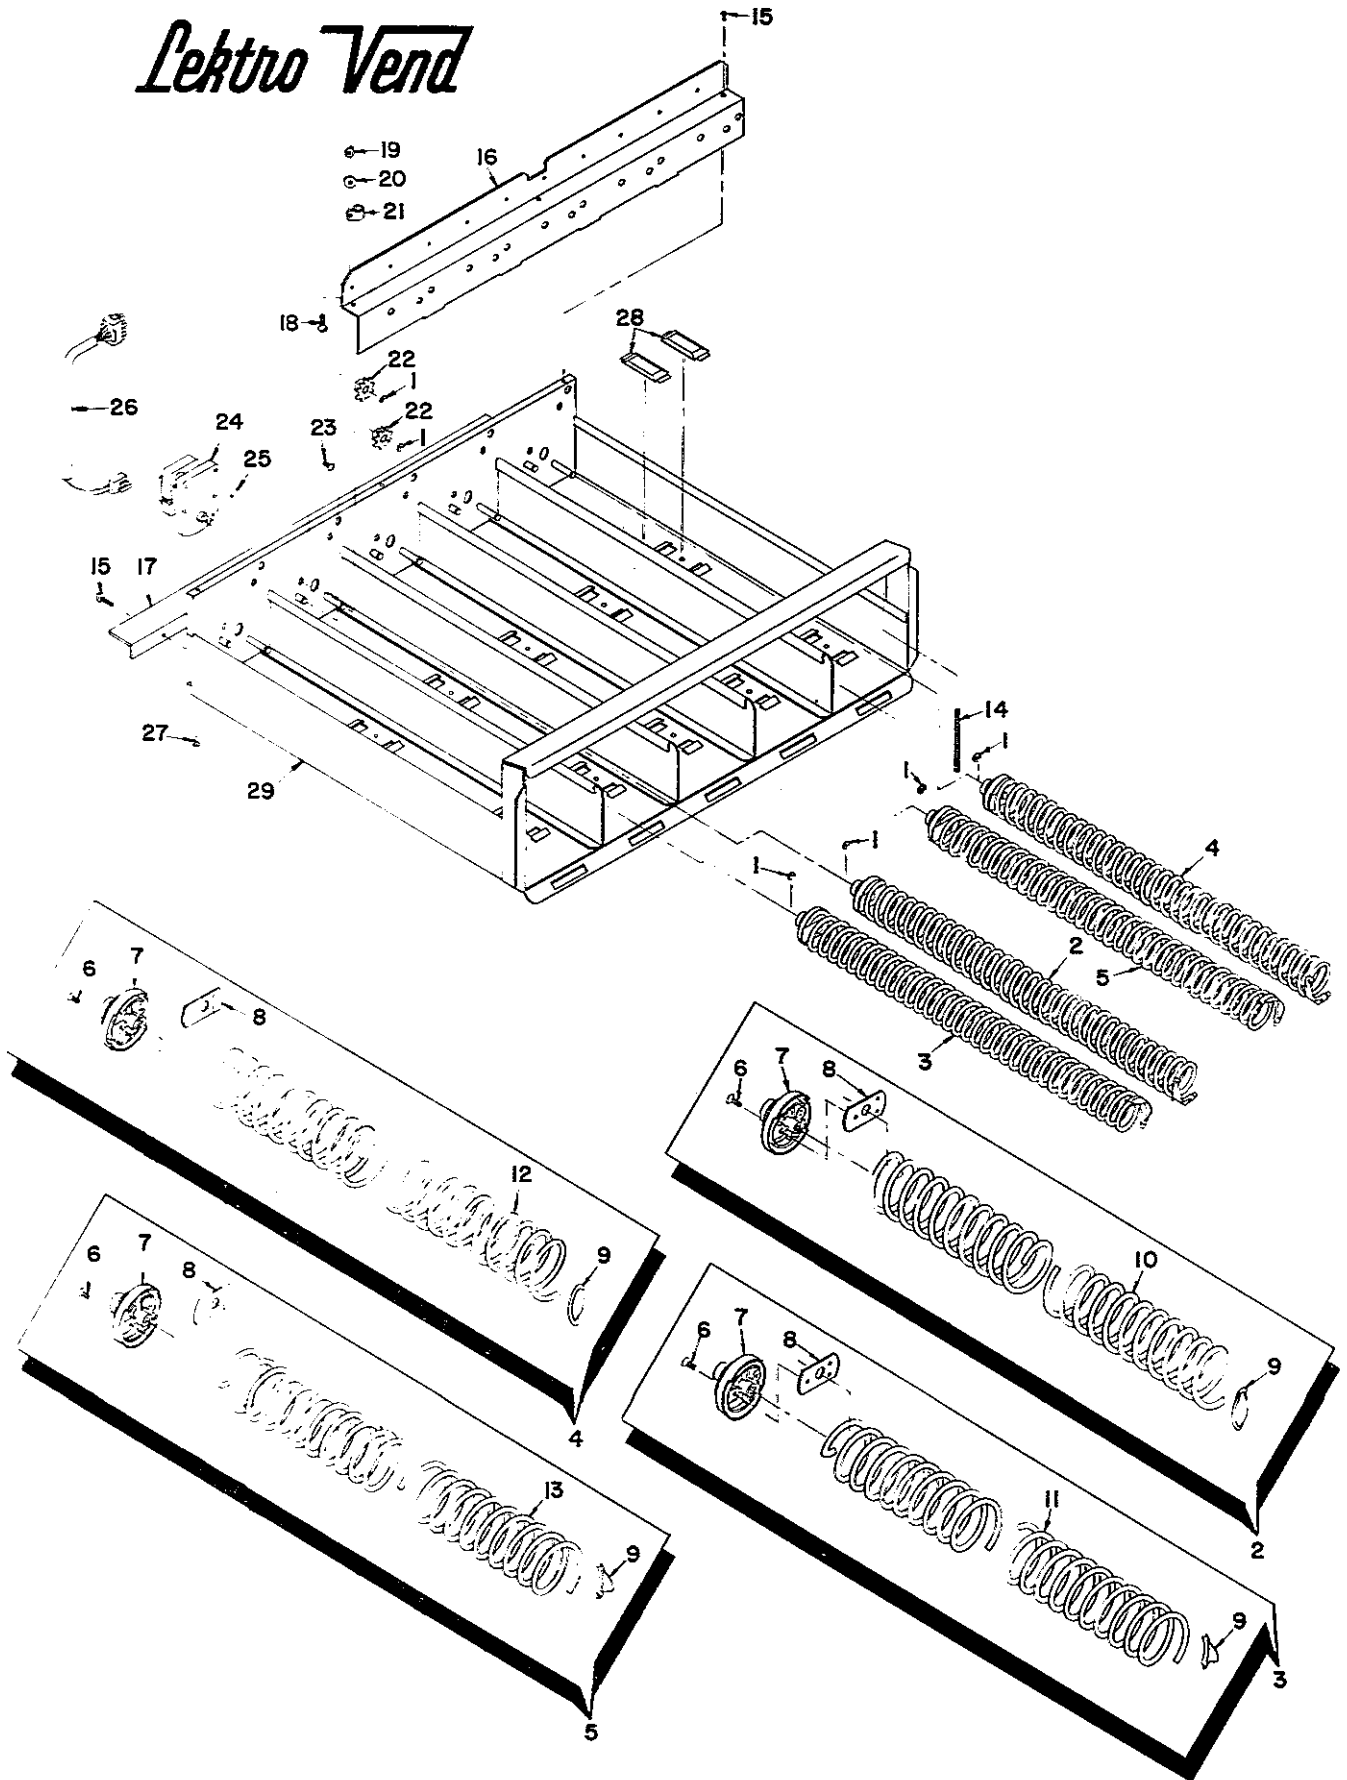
CENTER TRAY ASSEMBLY COMPLETE -- 5 COLUMN
